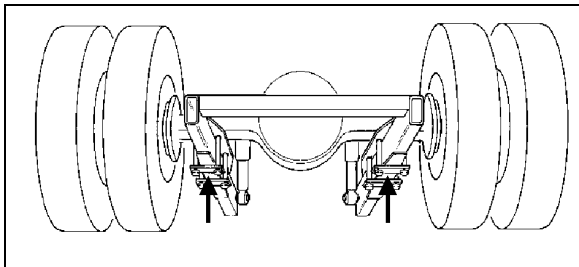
JACKING POINTS ON DRIVE AXLE 11005
